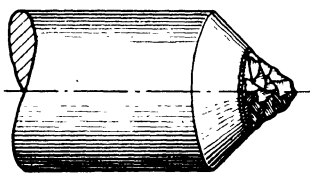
DIAMOND TOOL FOR WHEEL TRUING
